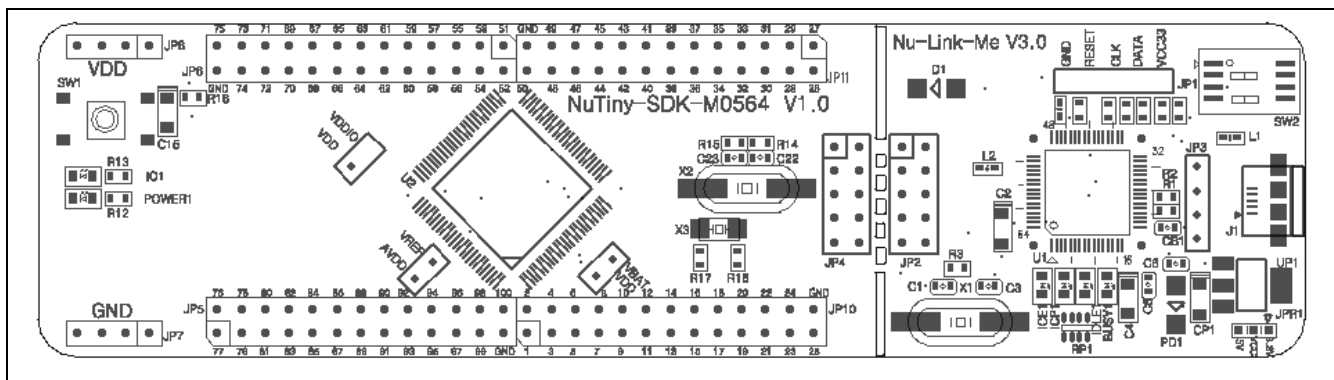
NuTiny-SDK-M0564 PCB Placement
